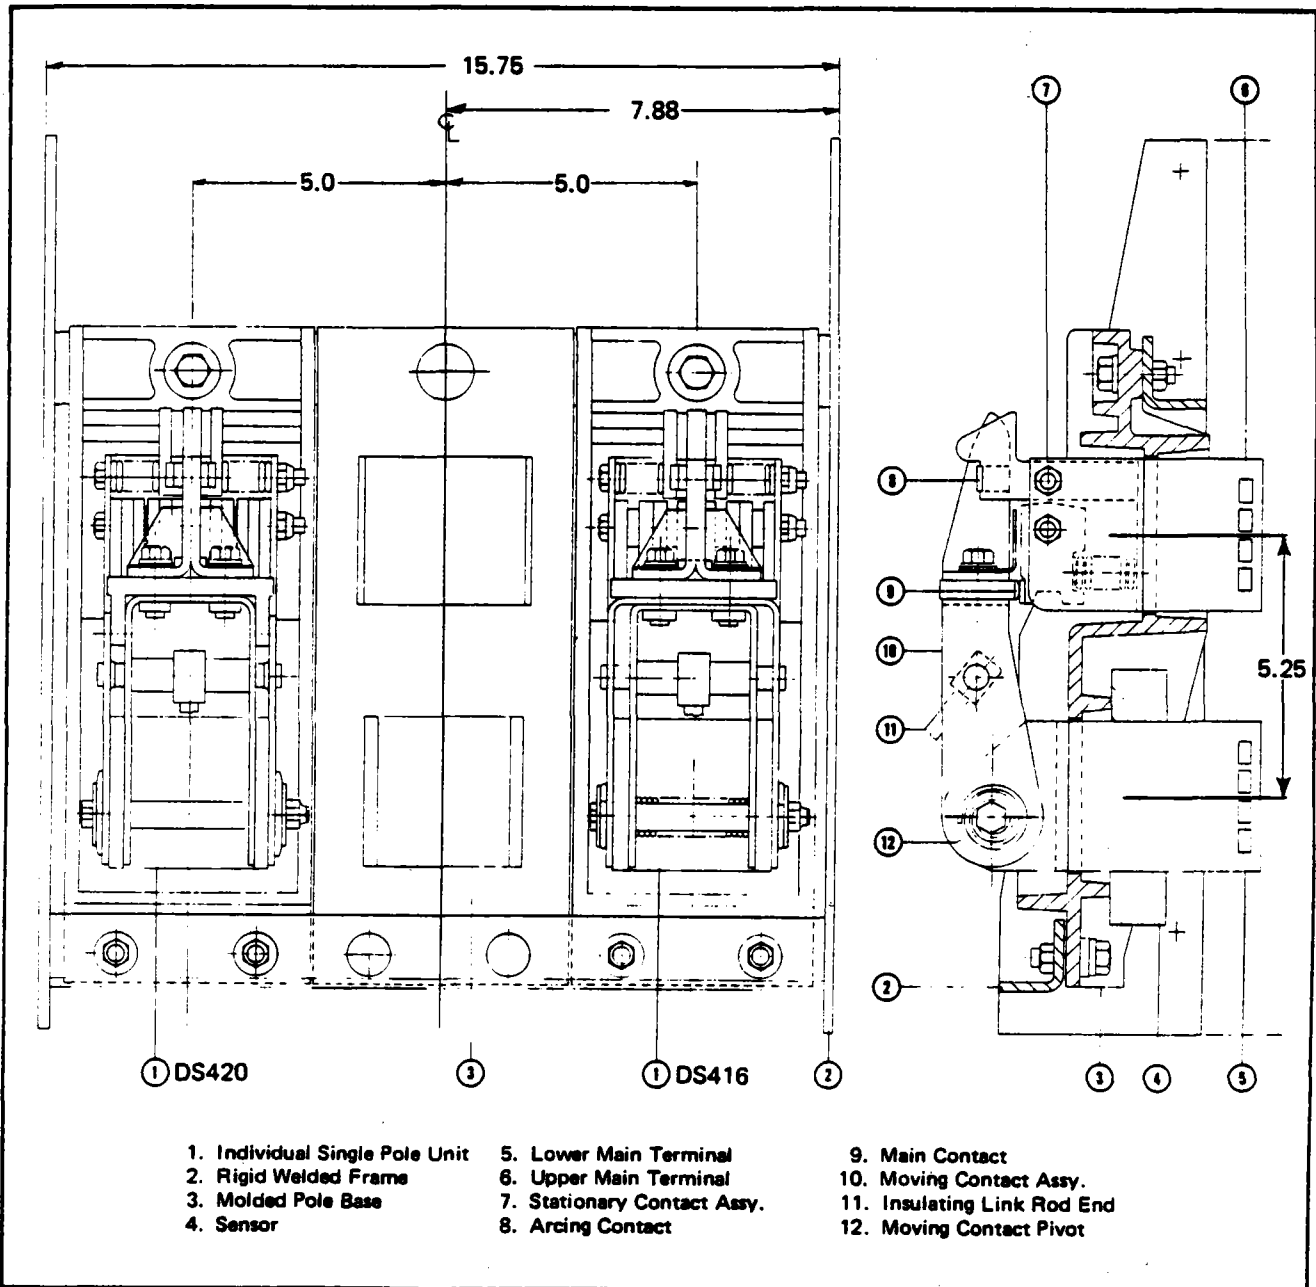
Three-Pole Assembly of DS-416 and DS-420 Pole Units on Frame
